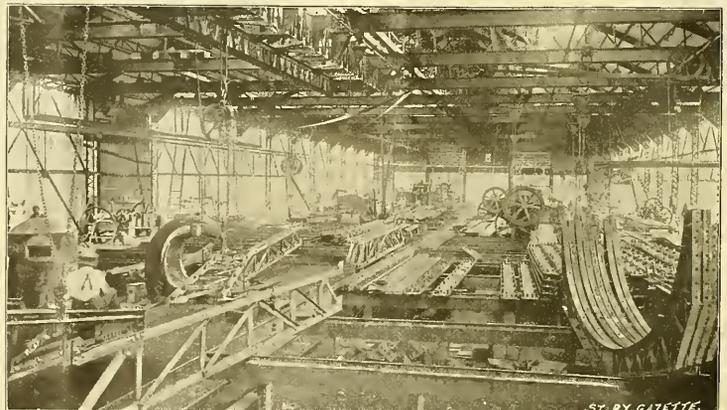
INTERIOR VIEW OF TRUSS SHOP—BERLIN IRON BRIDGE WORKS.
